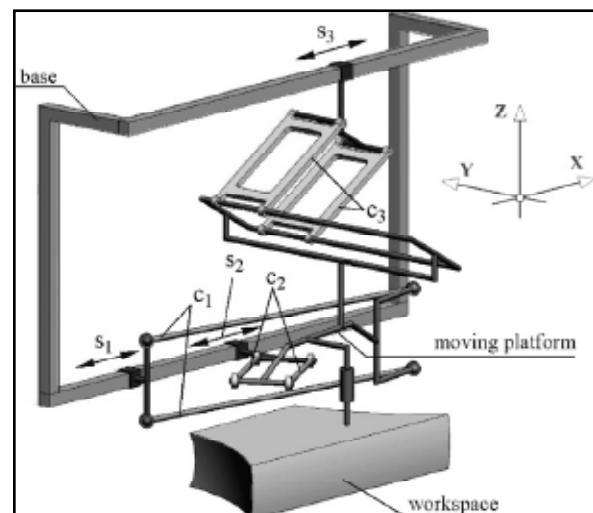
Parallel Structured Milling Machine with Long X Travel
